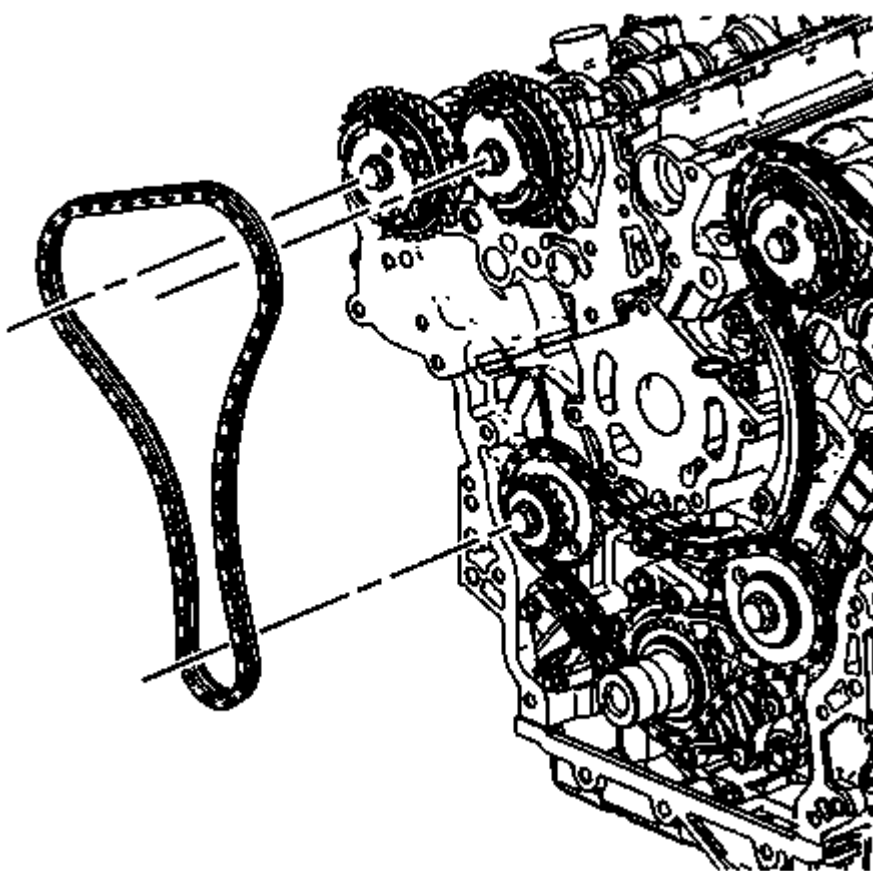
View Of Right Bank Secondary Camshaft Drive Chain
